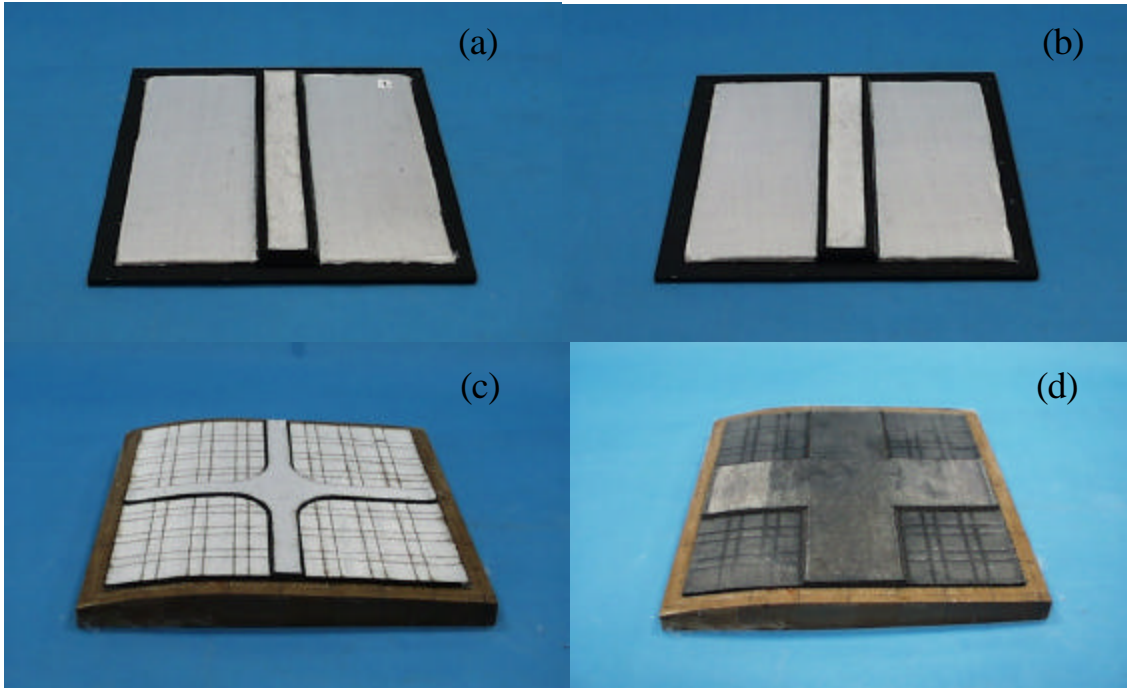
8" x 8 " Single Stiffener Mechanical Test Panels (a) 1 and (b) 2; curved cruciform panels (c, d) formed/cured on resin infused LOM tool (Notice the remnants of diamond decubing pattern in skin sections of c and d).
